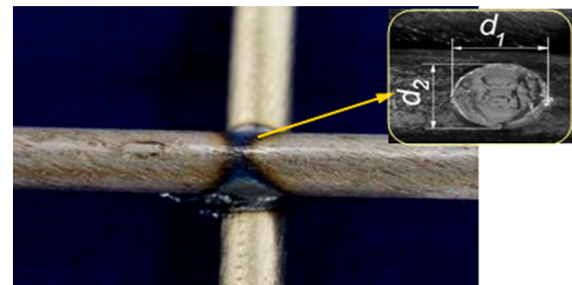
The melted contact zone diameters of successfully welded samples have been measured to be 4–5 mm
